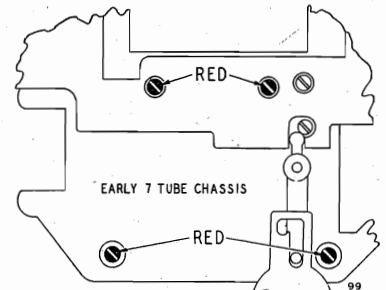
Location of 4 Red Mounting Screws in Early Models
